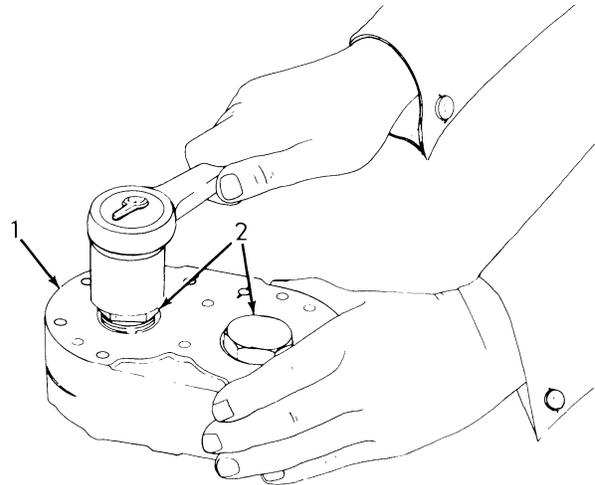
REMOVING DISCHARGE VALVE SEAT T-77191
